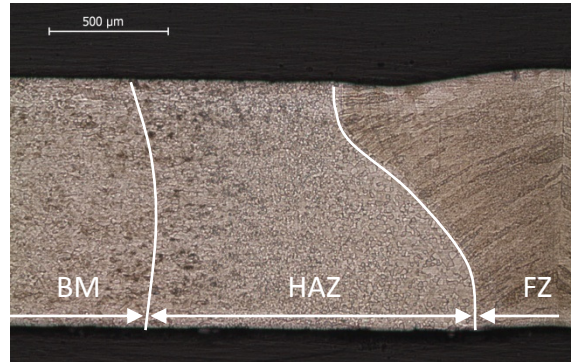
Macrograph of a similar joint for design evaluation welded across the RD – welding zones identified
